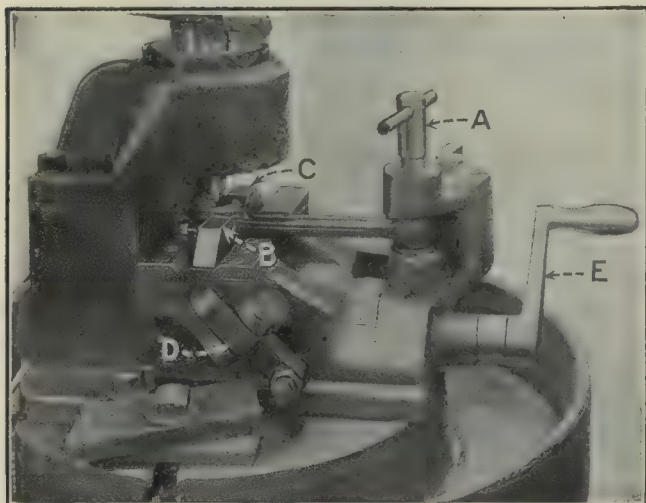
FINISH-BORING LARGE END AND FACING ONE SIDE
